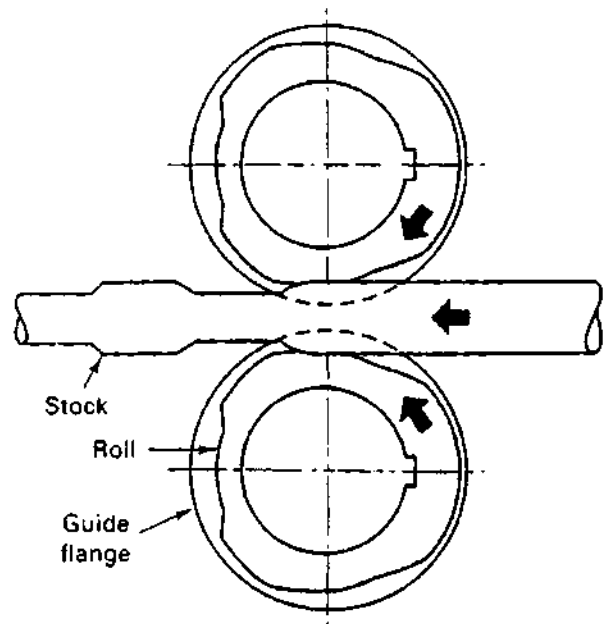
A4e The roll forging process. The stock is formed between two shaped rolls. (Courtesy Forging Industry Association.)
